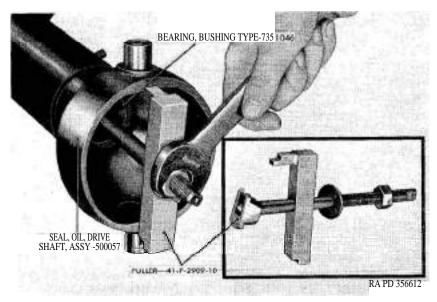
Removing bushing-type bearing and oil seal assembly from front -axle housing.
